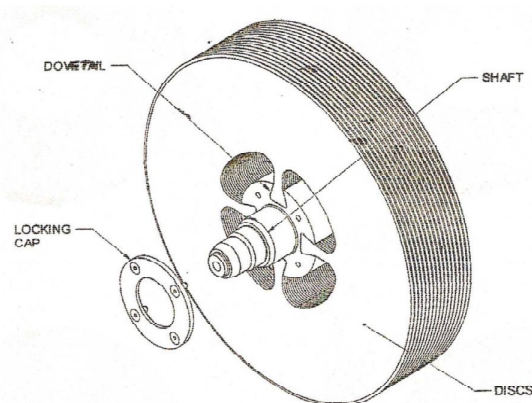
Rotor of a multidisc Tesla bladeless turbine [3]
